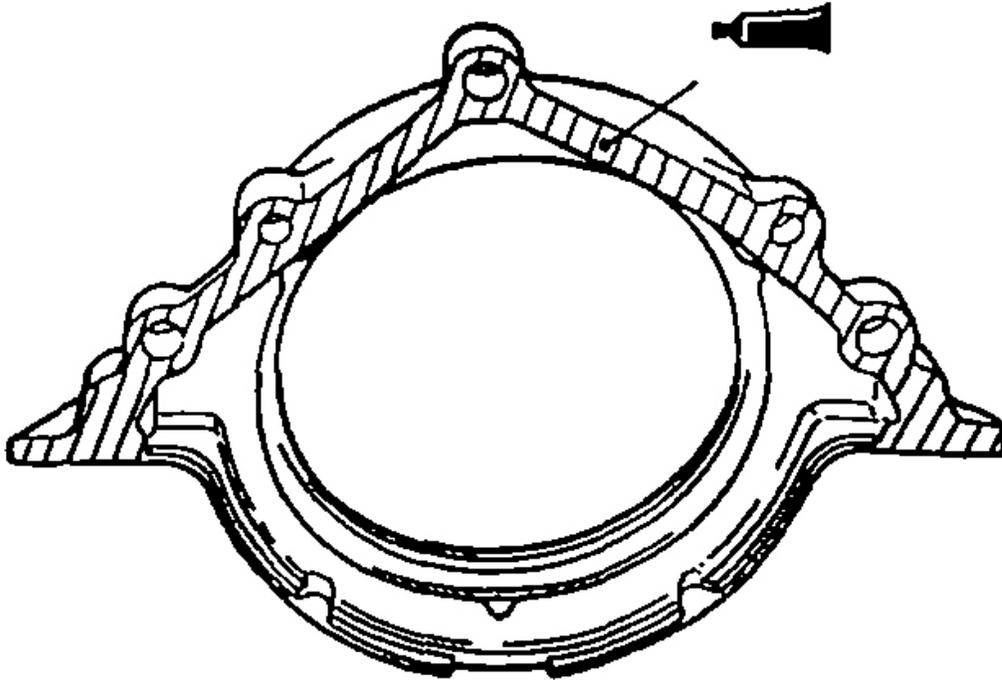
Installing Crankshaft Rear Oil Seal (1 Of 2)
